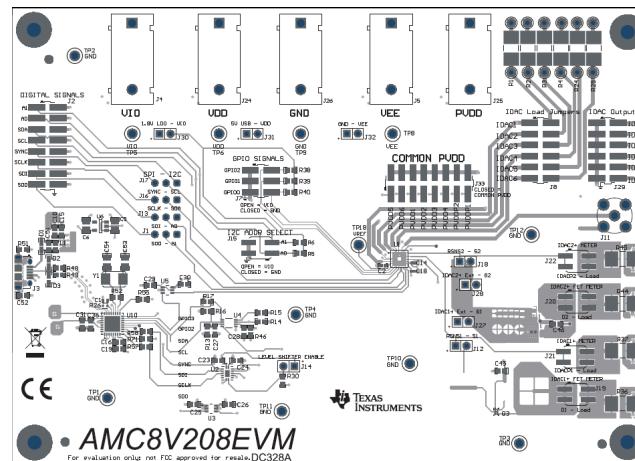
AMC8V208EVM PCB Top Layer Layout
